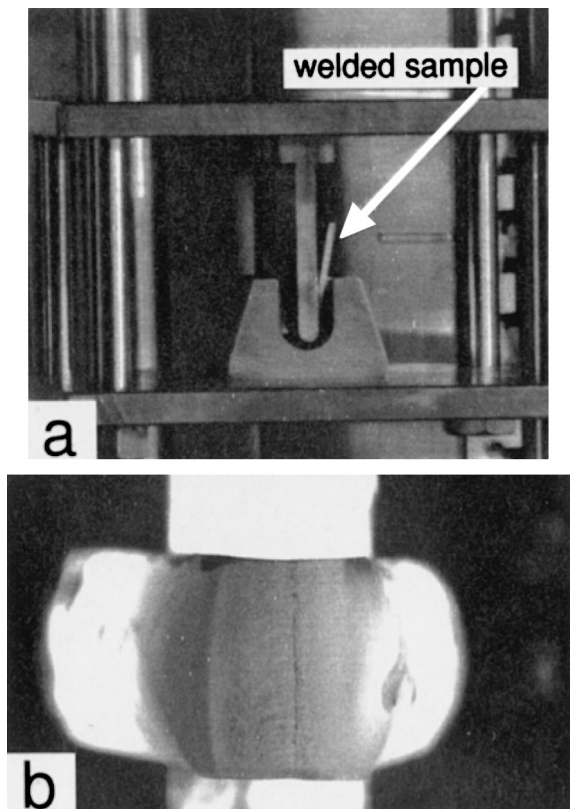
The test fixture (a) used for the surface-bending-test on specimens from weld C1 and C3. (b) The bent surface of the specimen from weld C3 (He = 5 appm) was free of defects by dye penetrant test.
